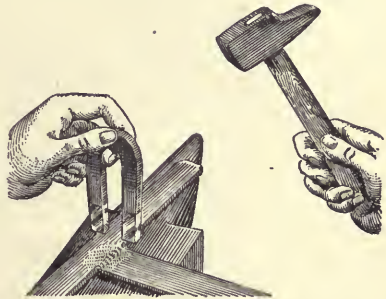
The hammering of a heated weld of mild steel should be stopped as soon as the magnet is attracted.
